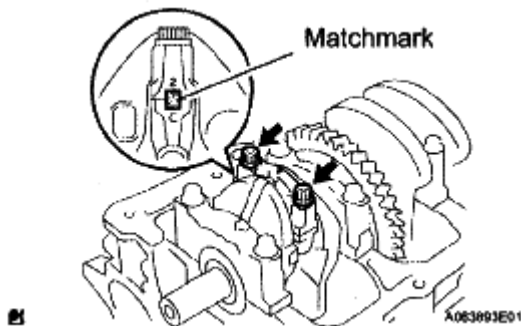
Identifying Matchmark On Connecting Rod And Cap
